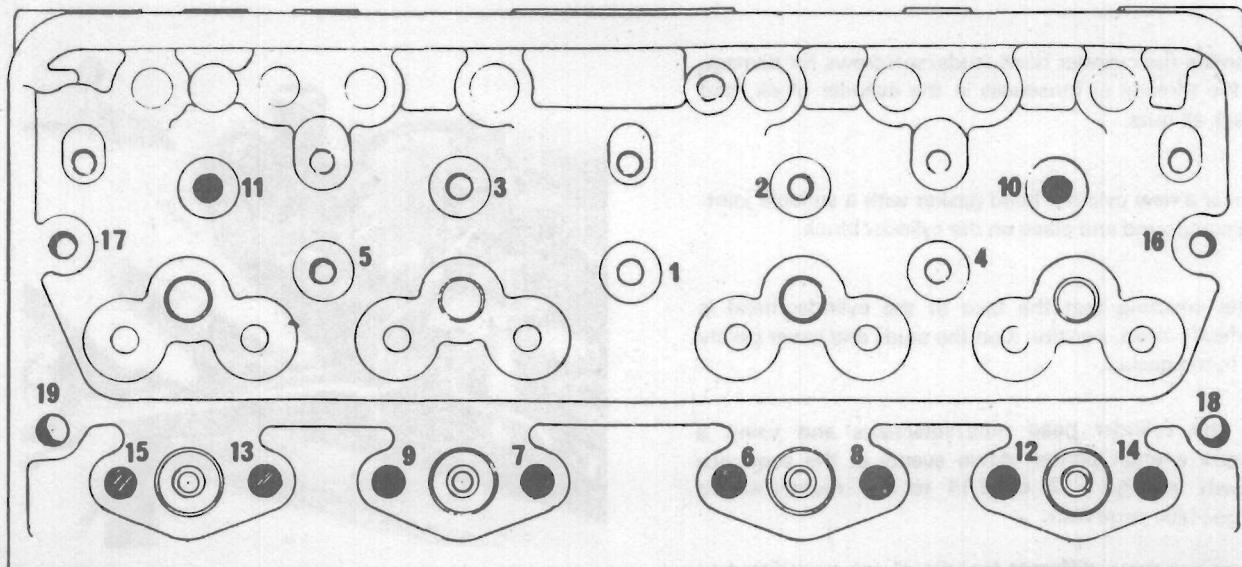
Cylinder Head Tightening Sequence (4.192 and 4.203 engines)
